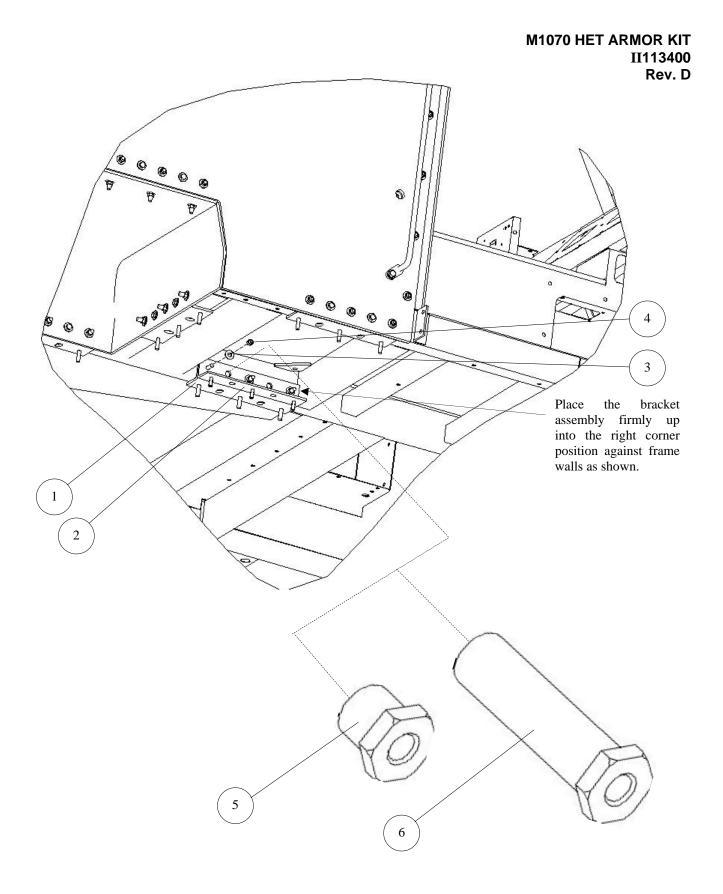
Assemble Bottom Rear Brackets and Match-Drill Cab Frame Rail.
